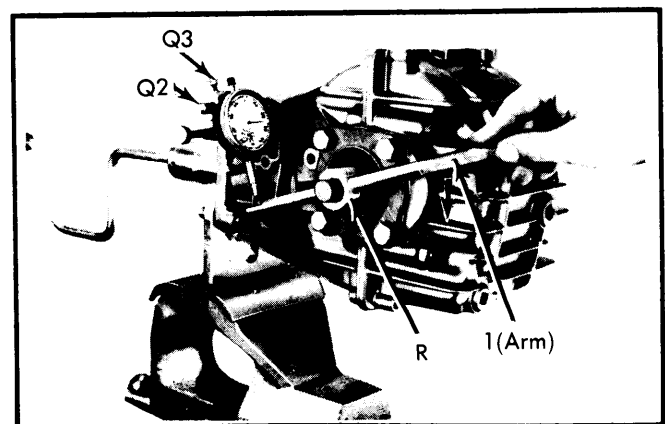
Measuring Ring-to-Pinion Gear Backlash
